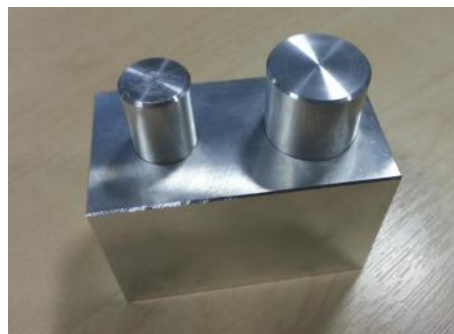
Re-designed mould. Built in aluminium, it consisted of two circular holes with different radius (8 and 12 mm).
